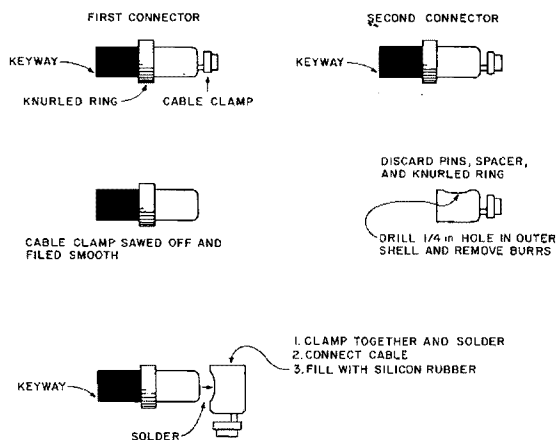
Ensure that there is a cable sheath, or add spaghetti, where the wires pass through the soldered junction. This will prevent chafing.
